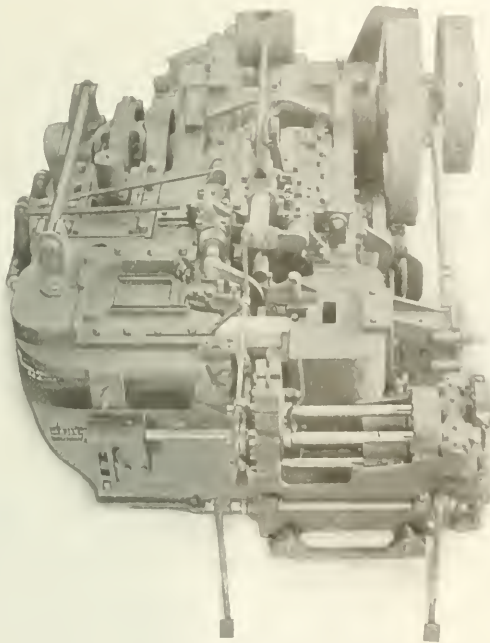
Top View of Ajax Two-blow Automatic Heading Machine for Hot Work
